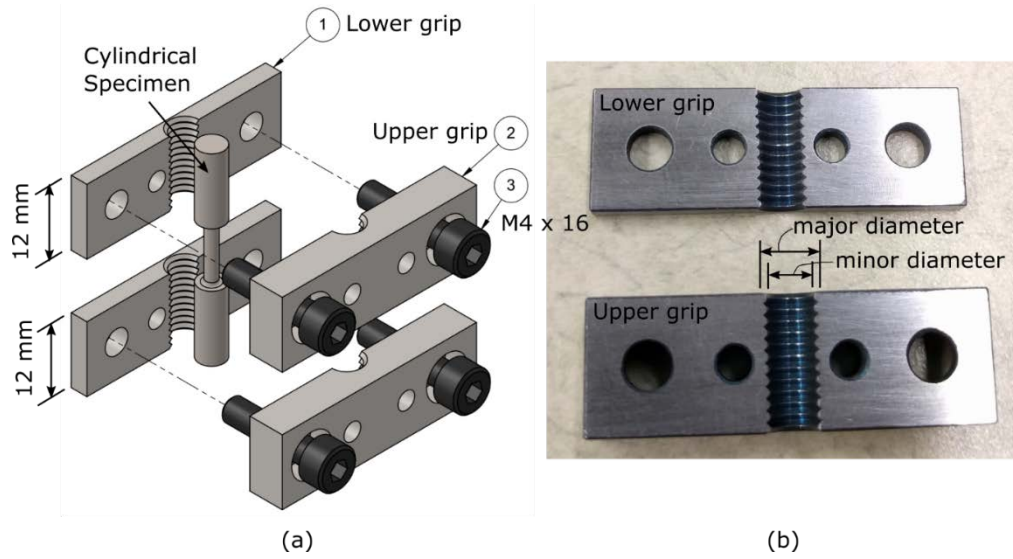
(a) Design assembly of cylindrical specimen grips with grooves and (b) picture of the grips
